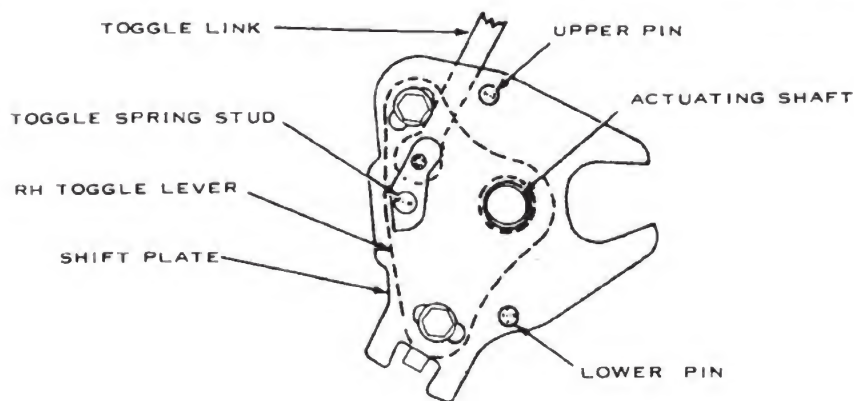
RH Toggle Lever and Shift Plate Assembly.
